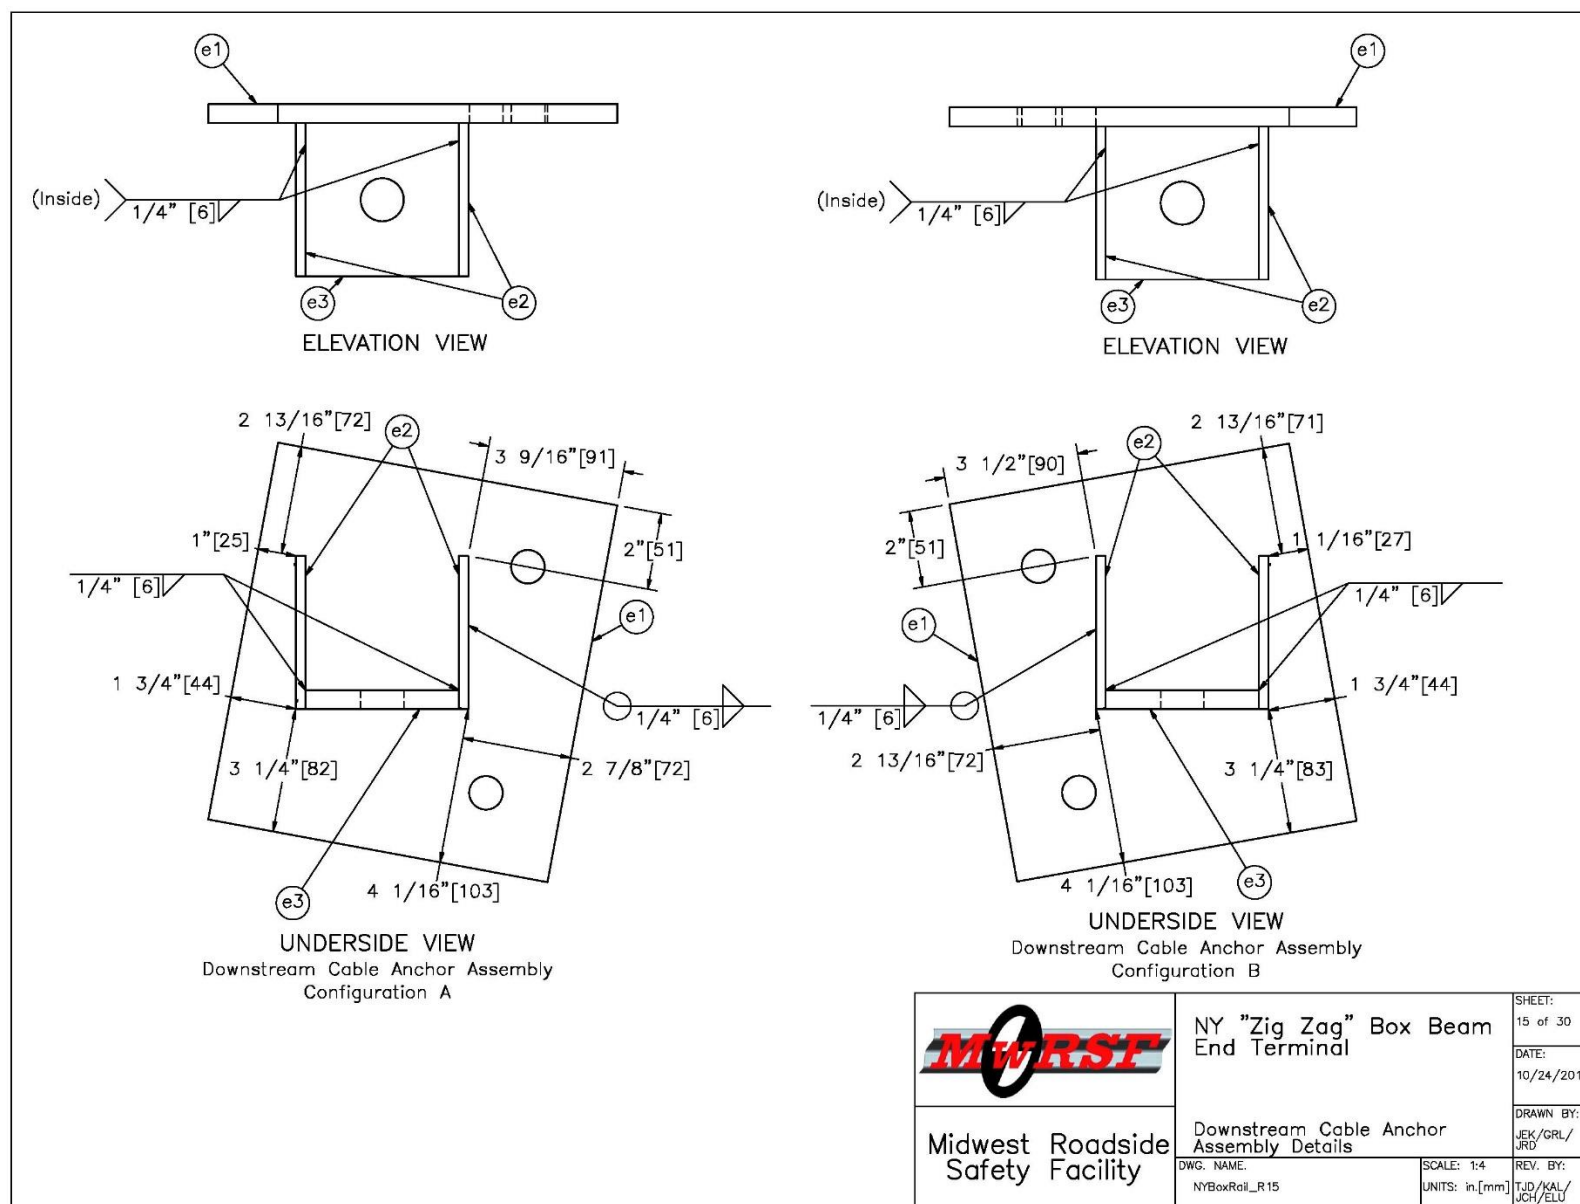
Downstream Cable Anchor Assembly Details, Test No. NYT-1
